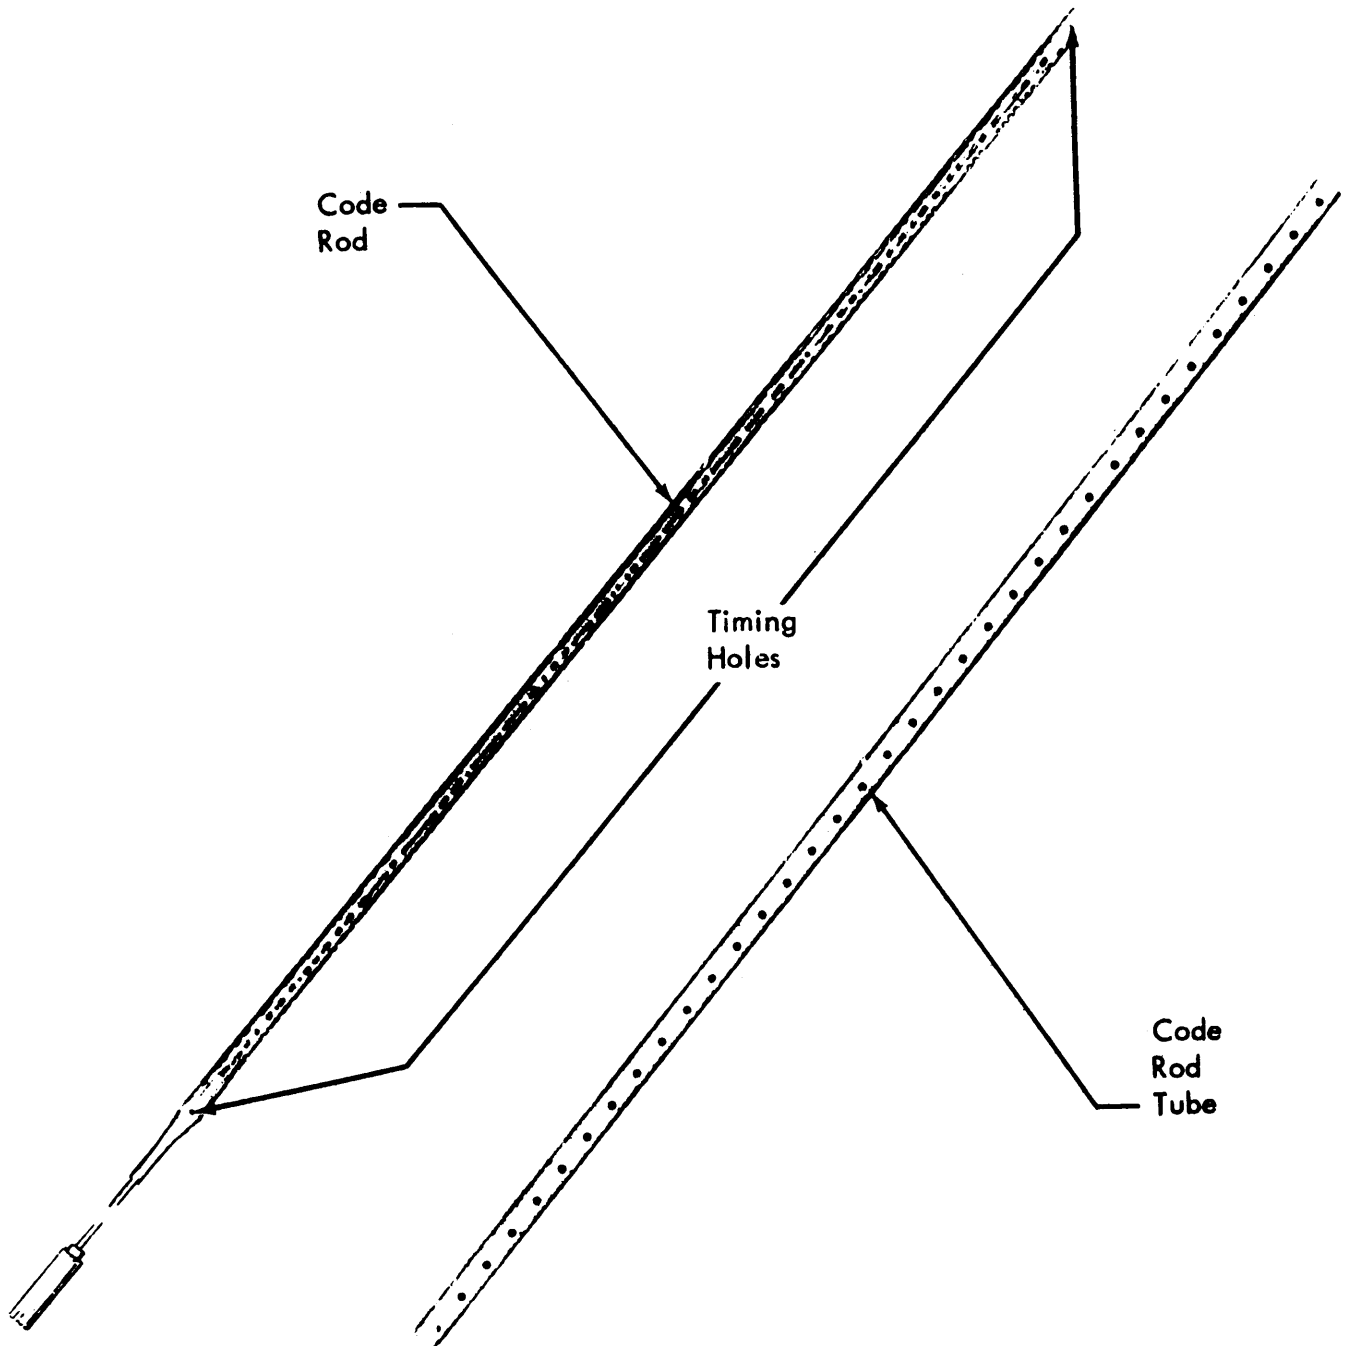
Code Rod and Tube for the IBM Wire Printer
